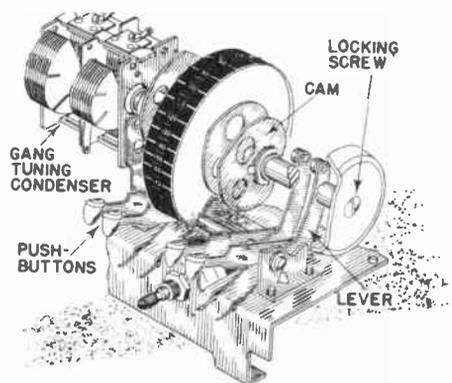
Typical cam-and-lever mechanism used in mechanical automatic tuning systems.
